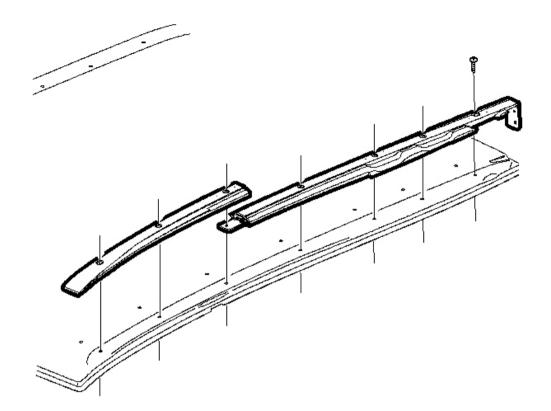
Removing/Installing Remaining Screws From Luggage Carrier Courtesy of GENERAL MOTORS CORP.
